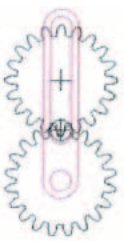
Full-turn epicycloid (cardioid) indexer using two identical involute spur gears.
